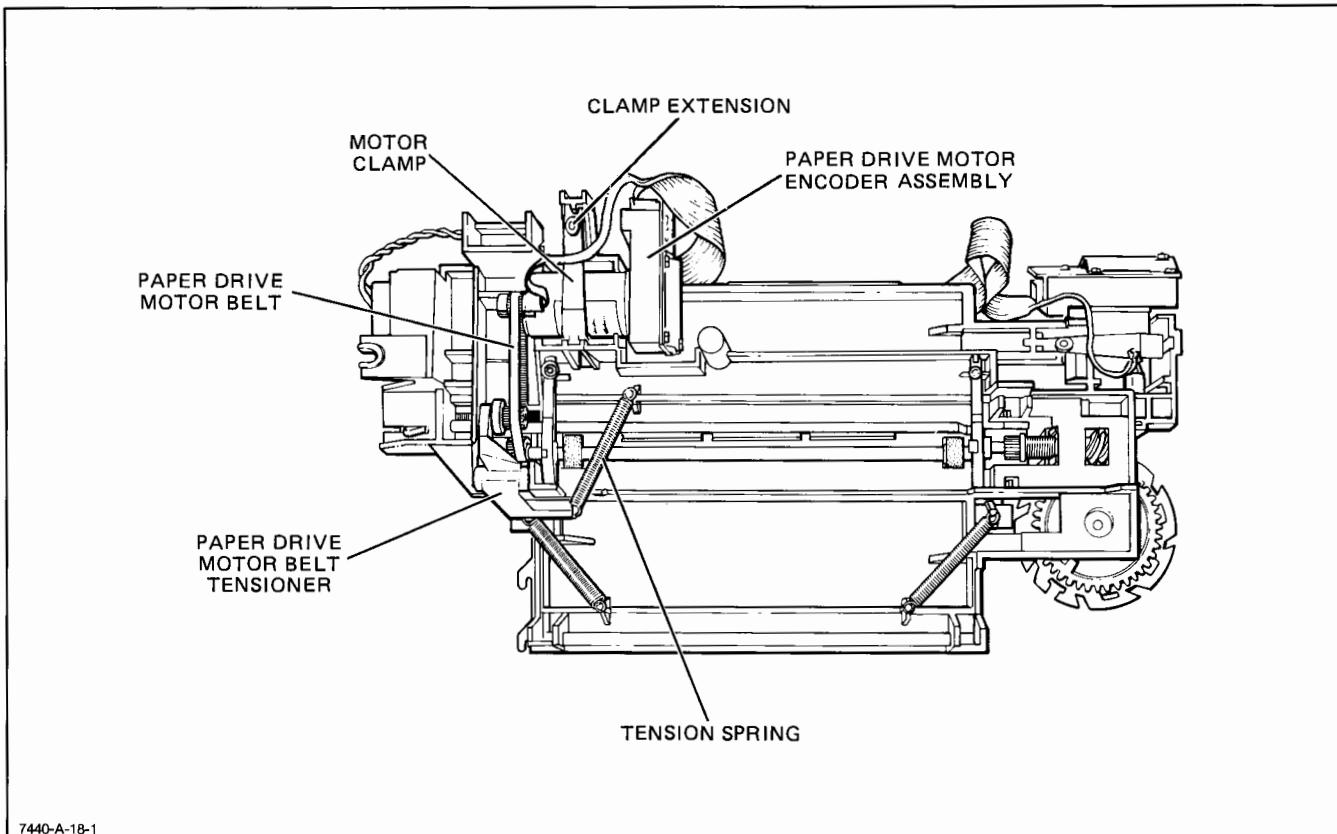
Paper Drive Motor/Encoder Assembly Removal
